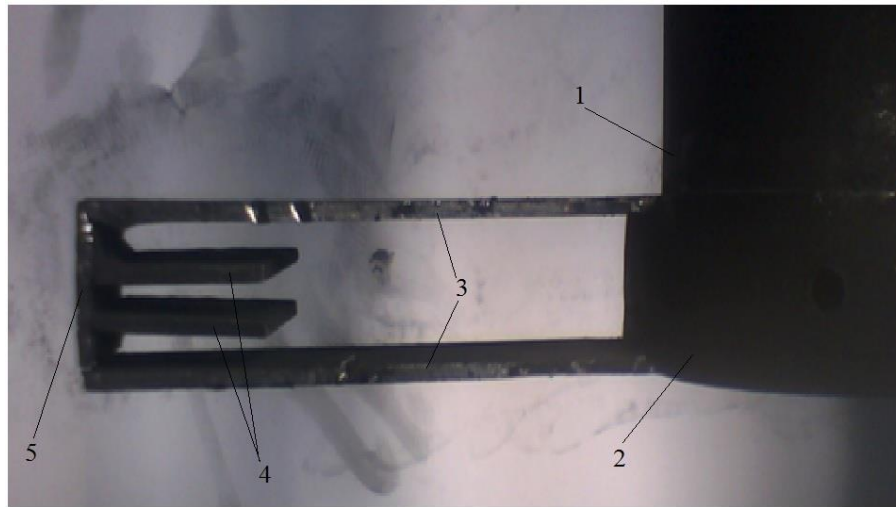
Working body of the new design: 1 - hollow shaft; 2 - working body mount; 3 - beaters; 4 – beater in the area of intensive milling; 5 - end beater.
